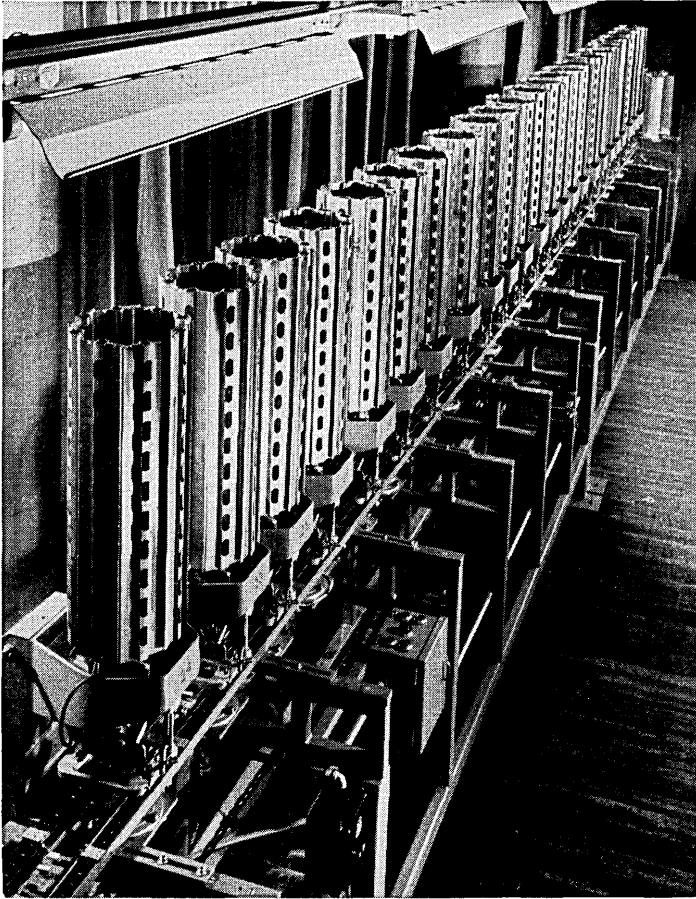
Autofab by General Mills, Inc.—a 24-head automatic component-attaching machine
